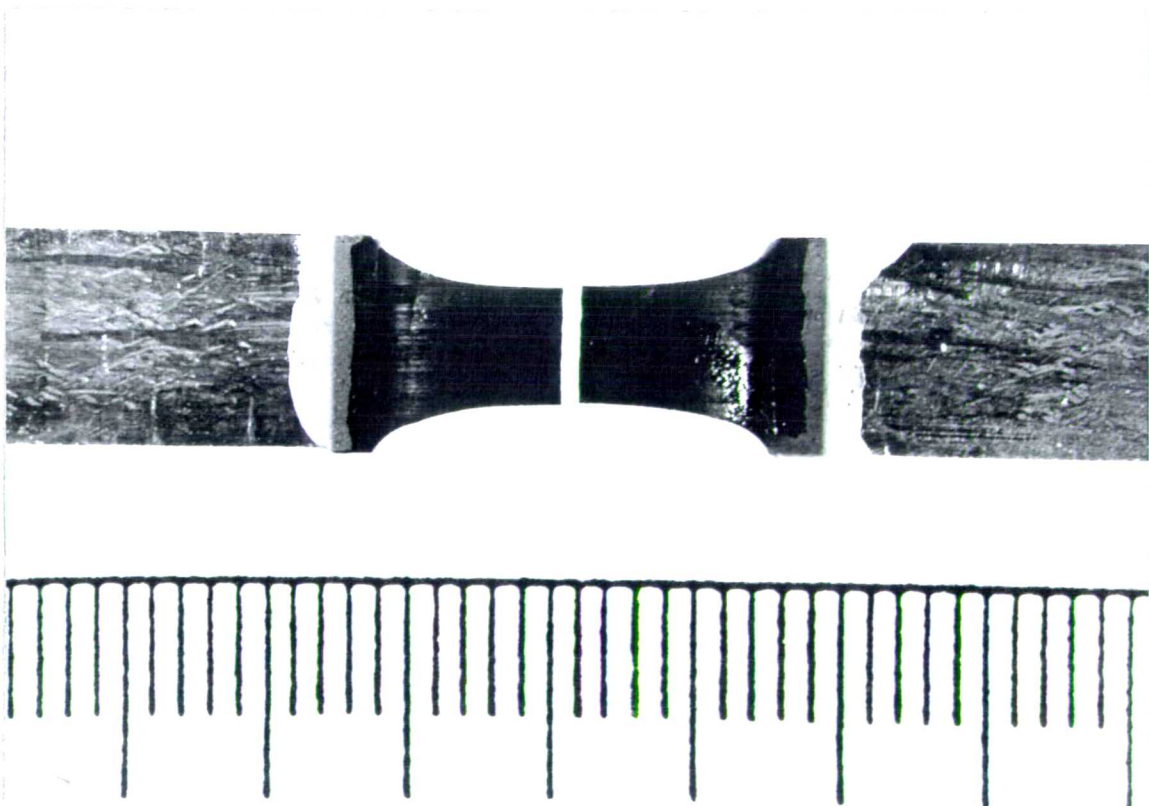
Typical failure in a tensile waisted specimen TW (scale in mm)
